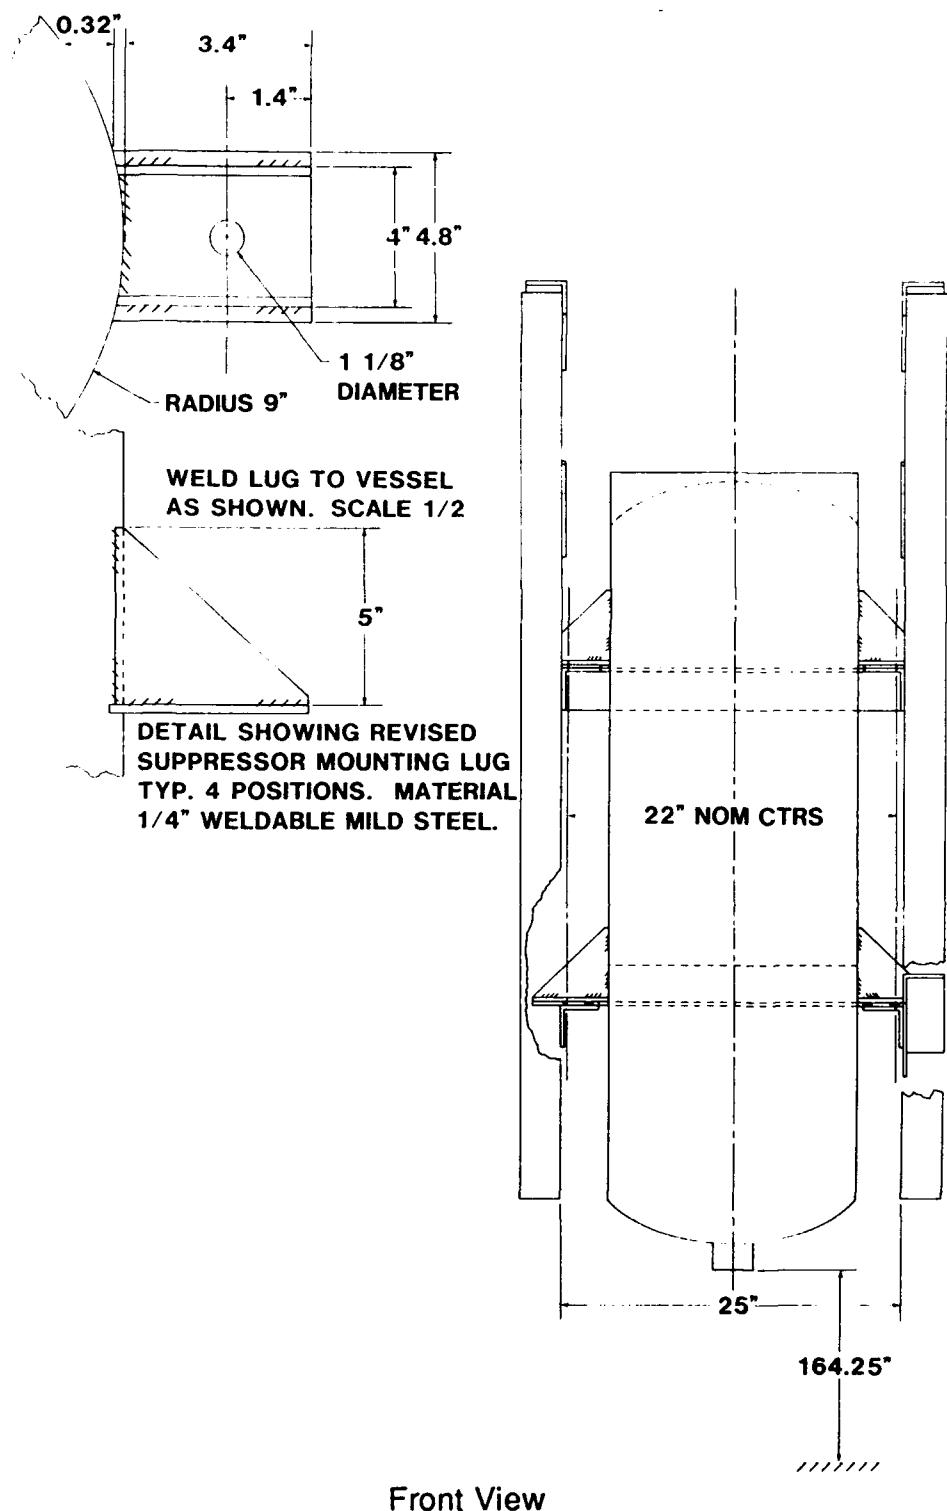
Company 'C' Cylinder Assembly without Shock Mount.
